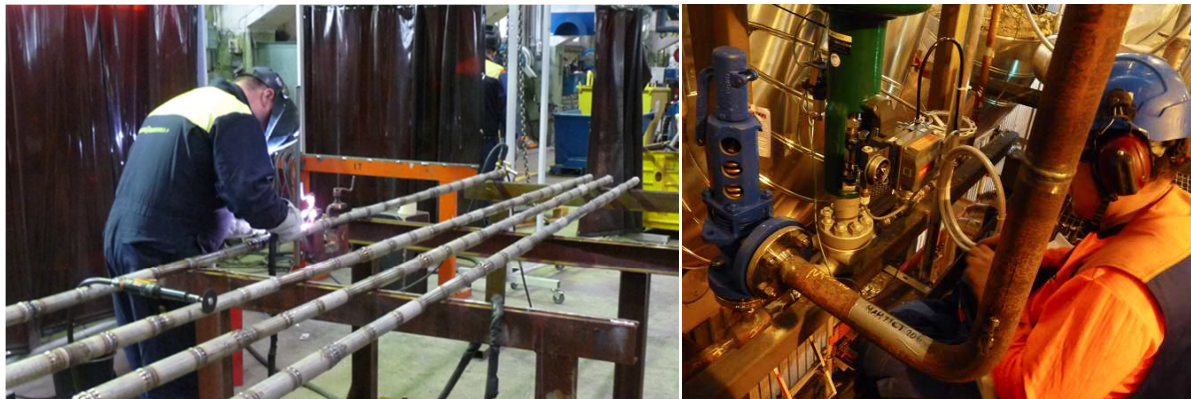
Welding test sections and setting up control valves of the steam loop
